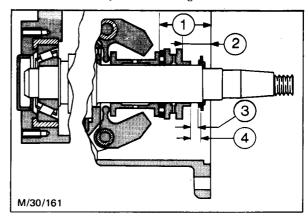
Governor Checking Dimensions (Dover & Dorset)
